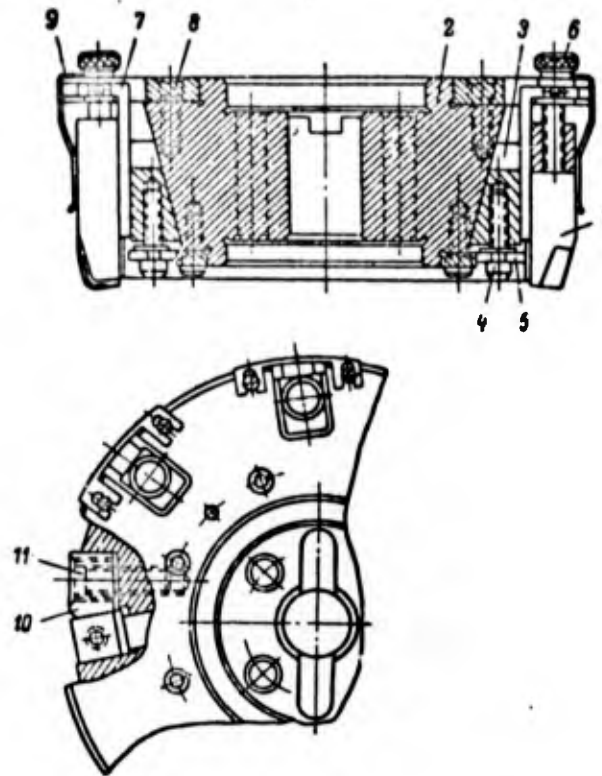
ENIMS End Milling Cutter With Adjustable Inserted Teeth
